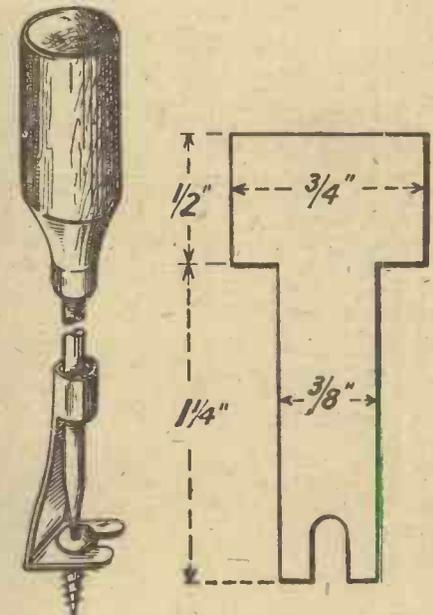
A piece of sheet brass cut to the shape shown on the right is bent to fit the screwdriver as indicated.
